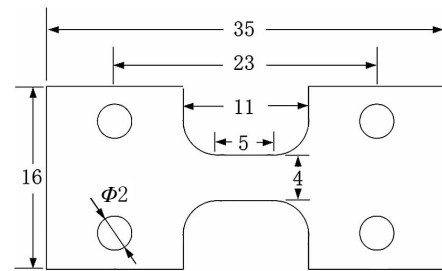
Schematic illustration of the tensile specimen (all dimensions in mm)
